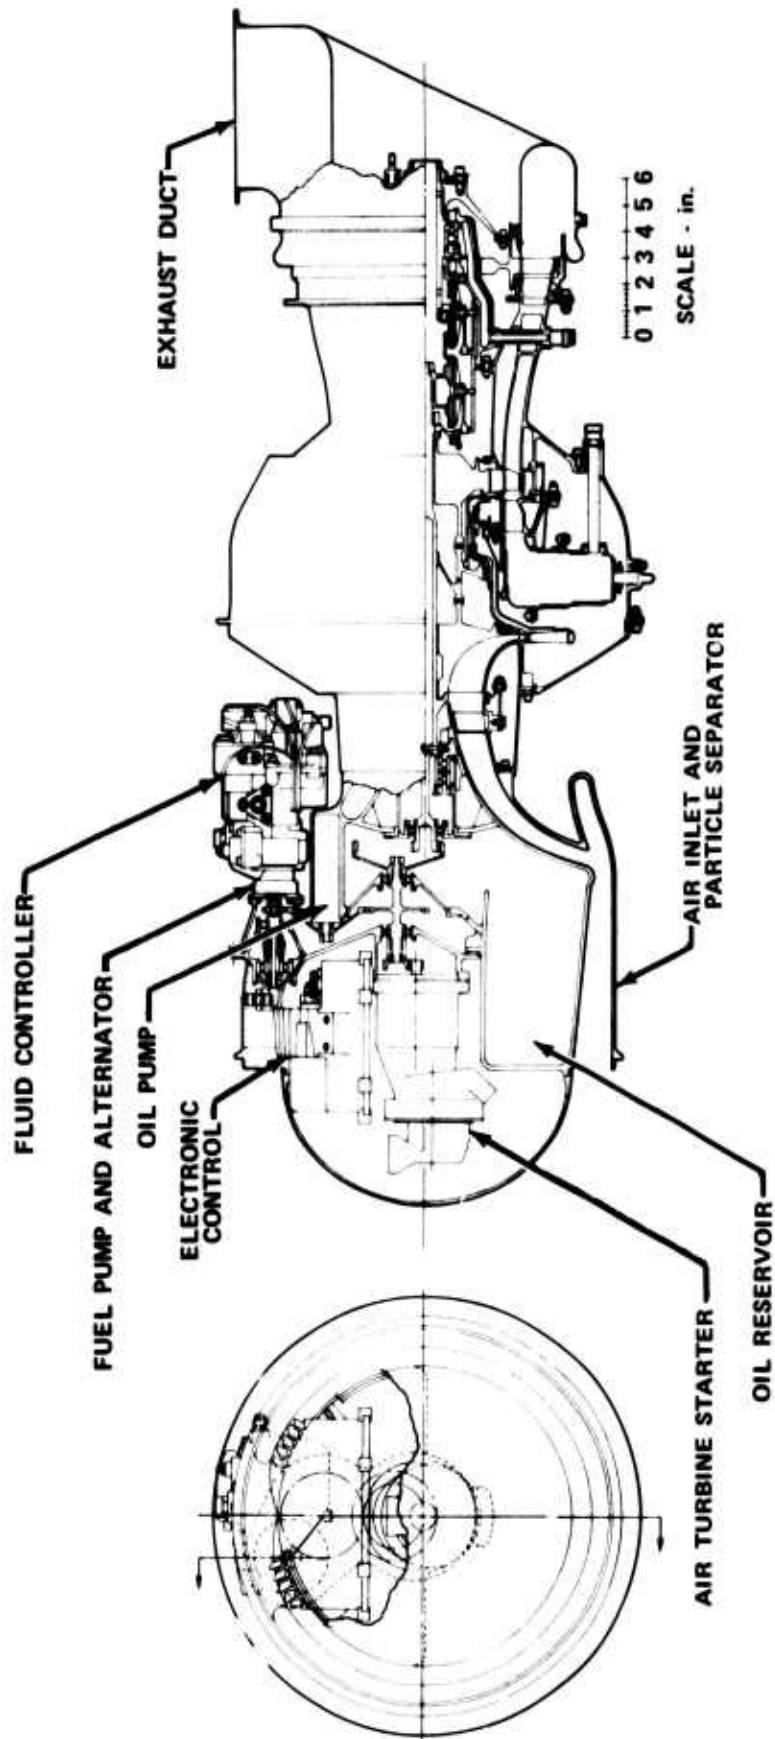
Cluster Gearbox/Air Turbine Starter Candidate
